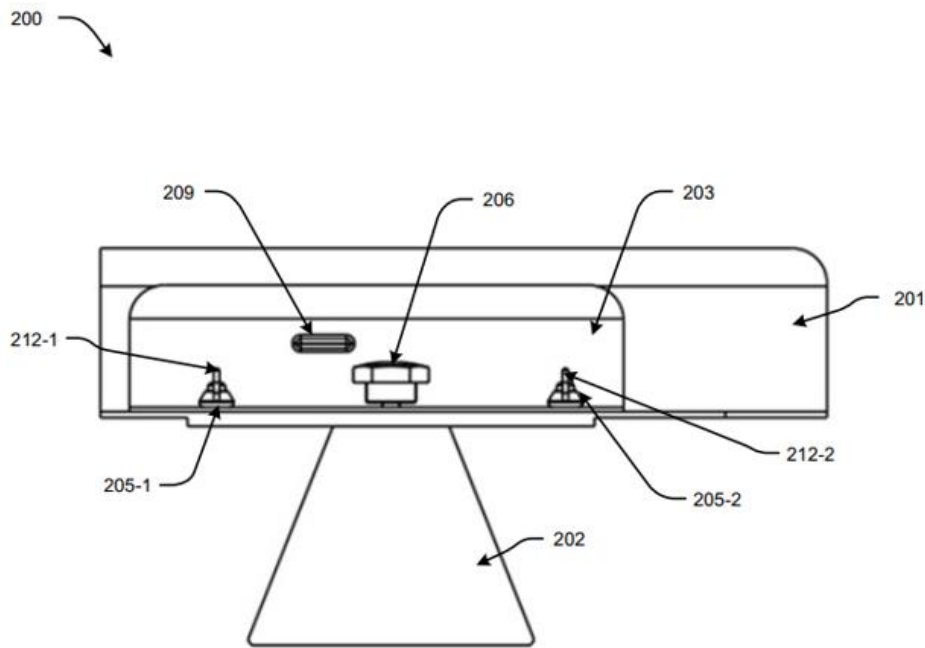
Cutting and slide assembly (part details). (Source: author)
